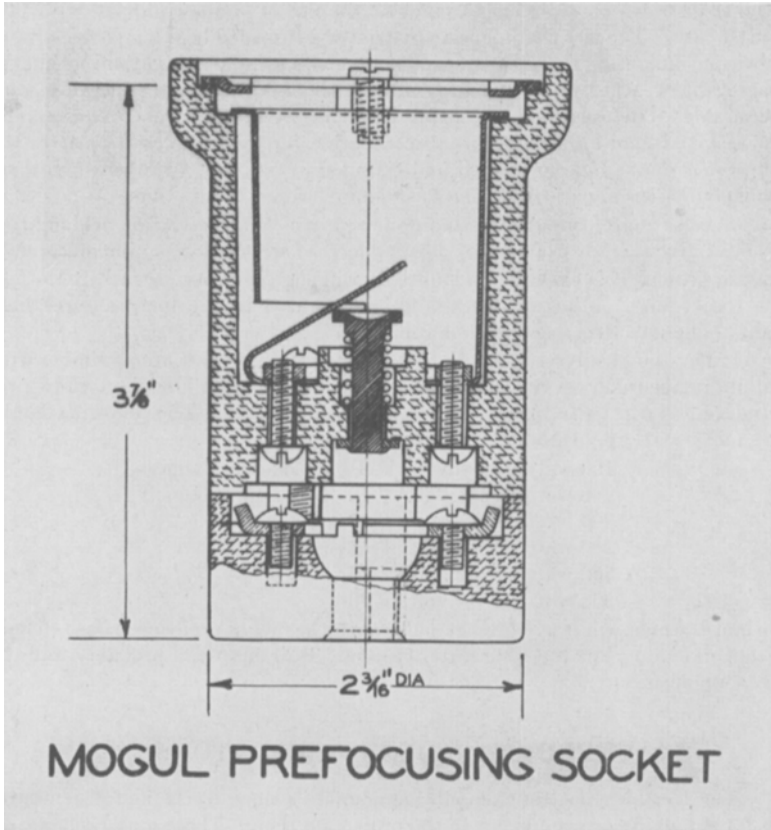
Sectional View of Preliminary Design of Mogul Prefocusing Socket.
